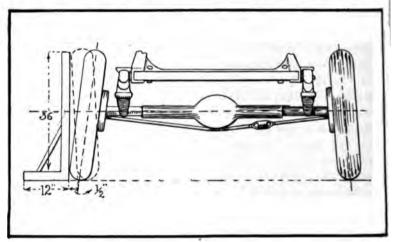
Method of Bracing Sprung Rear Construction by Truss Rod.
